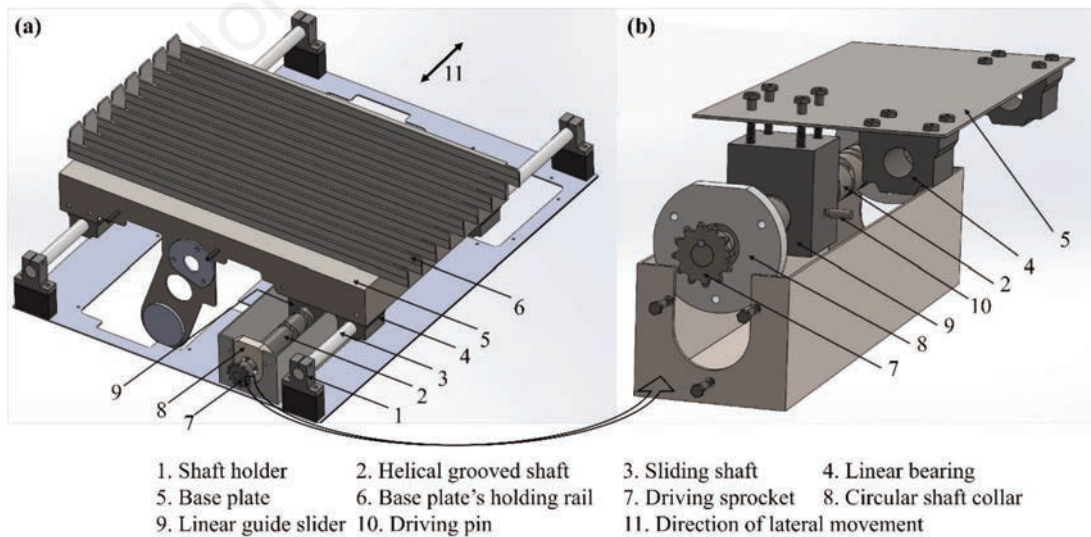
Detailed design and assembly of the component used for (a) lateral movement mechanisms of the seedling plug-tray cutting mechanism with (b) a closer view of its helical grooved slider assembly system.
